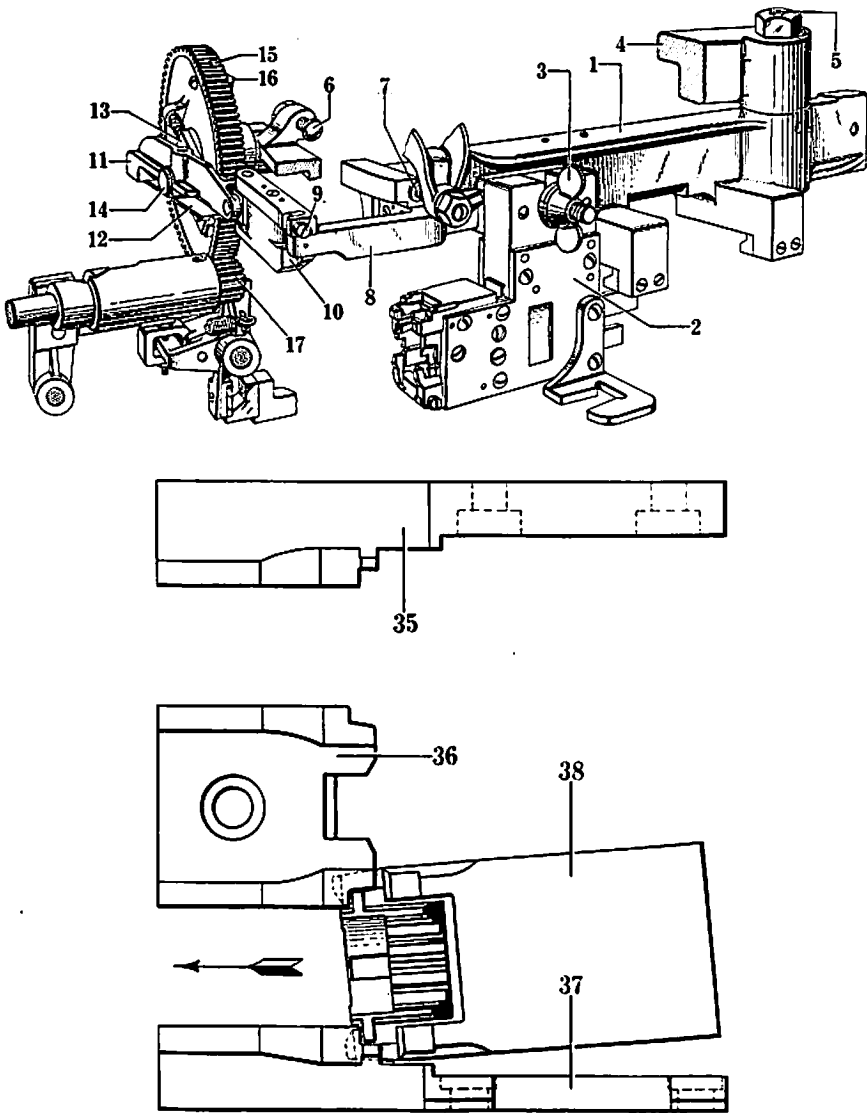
Perspective View of the Mixer Distributor Box Clutch Mechanism in Assembly. The clutch parts shown in the illustration provide the driving power necessary for shifting the distributor box from one distributor to the other as the font selector mechanism is operated by the matrices in the automatic process of font selection. The detail illustration is a top view of the distributor lift rails 35, 36 and 37, between which the matrices are lifted into the front and back distributors. When the distributor box arm 1 (main drawing) banks against stop screws 6 and 7, the exact position of the distributor box and matrices with respect to the lift rails is determined. Screws 6 and 7 are adjusted to stop the distributor box in a precisely centralized position with respect to the lift rails, as illustrated. The procedure for adjusting the screws is outlined in the text.
